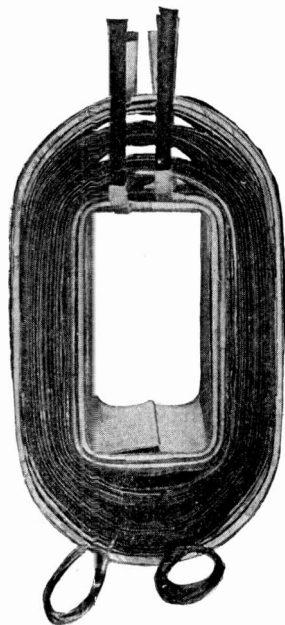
Method of Assembling Coils Sawing Oil Ducts
